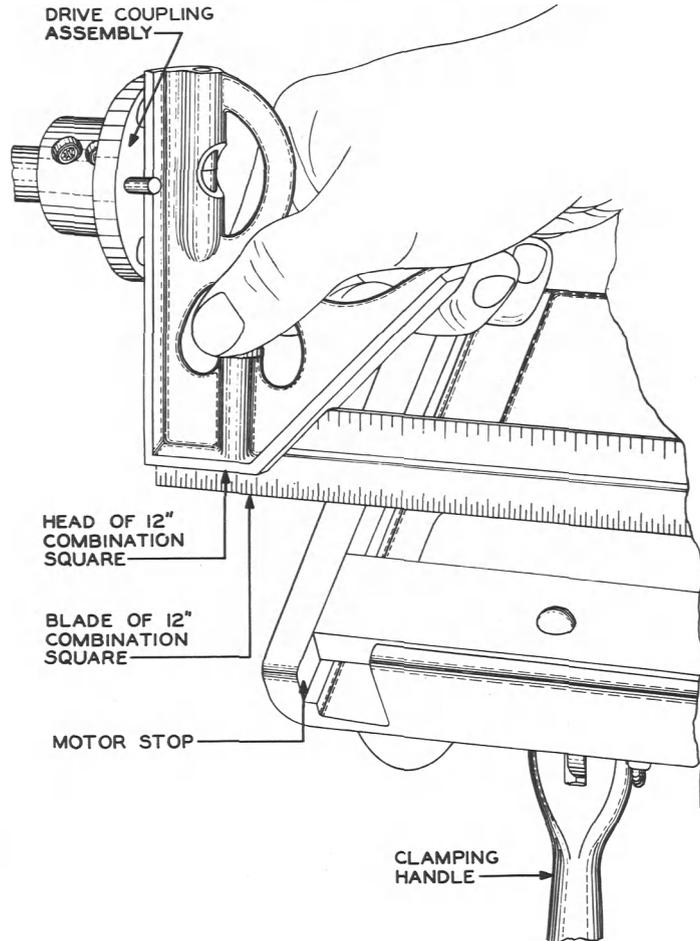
Method of Checking Horizontal Distance Between Coupling Assembly and Motor Stop
